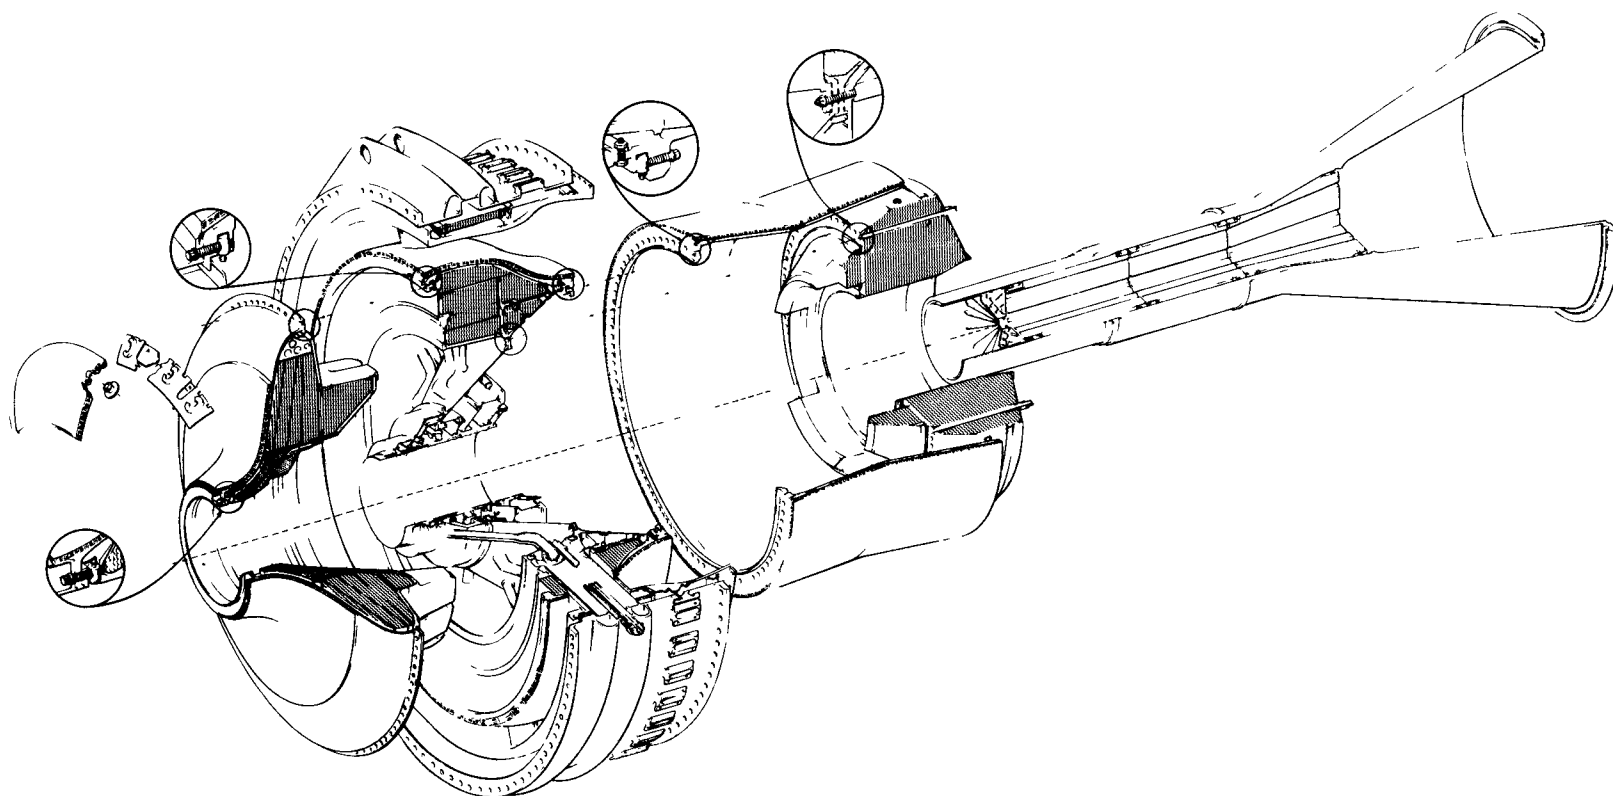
Rear shield exploded isometric cutaway view (Dwg. DI444)
